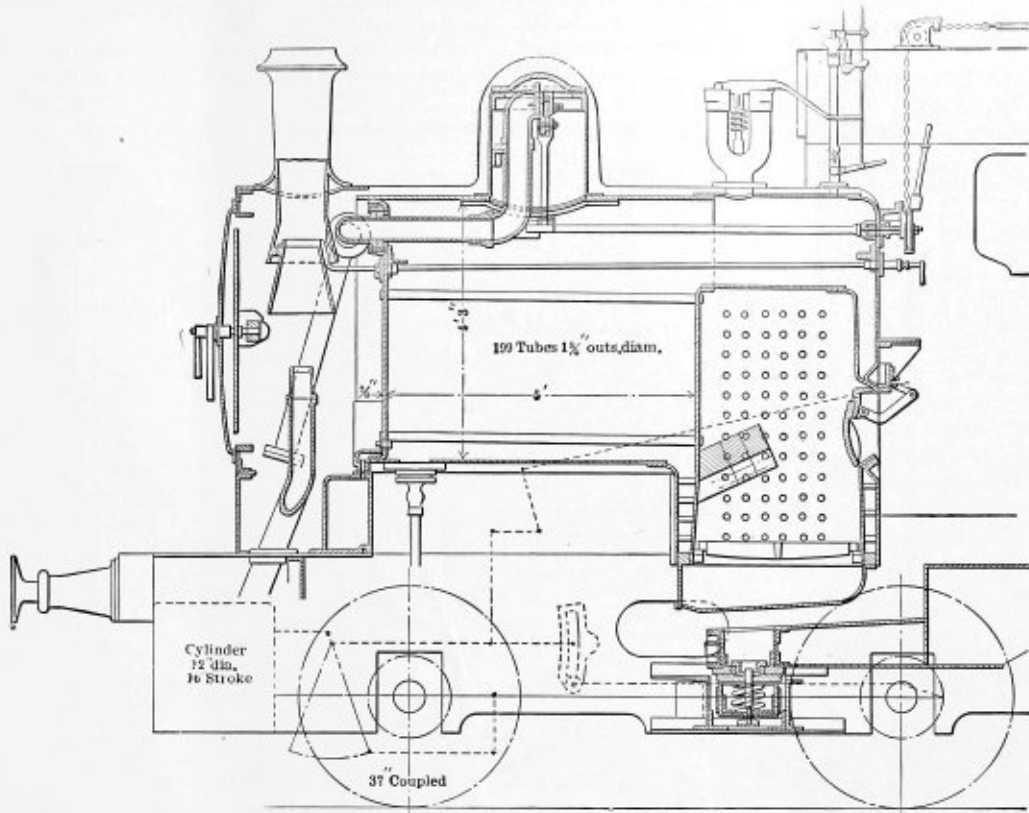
LOCOMOTIVE TYPE OF BOILER USED ON LANCASHIRE AND YORKSHIRE CARS.
